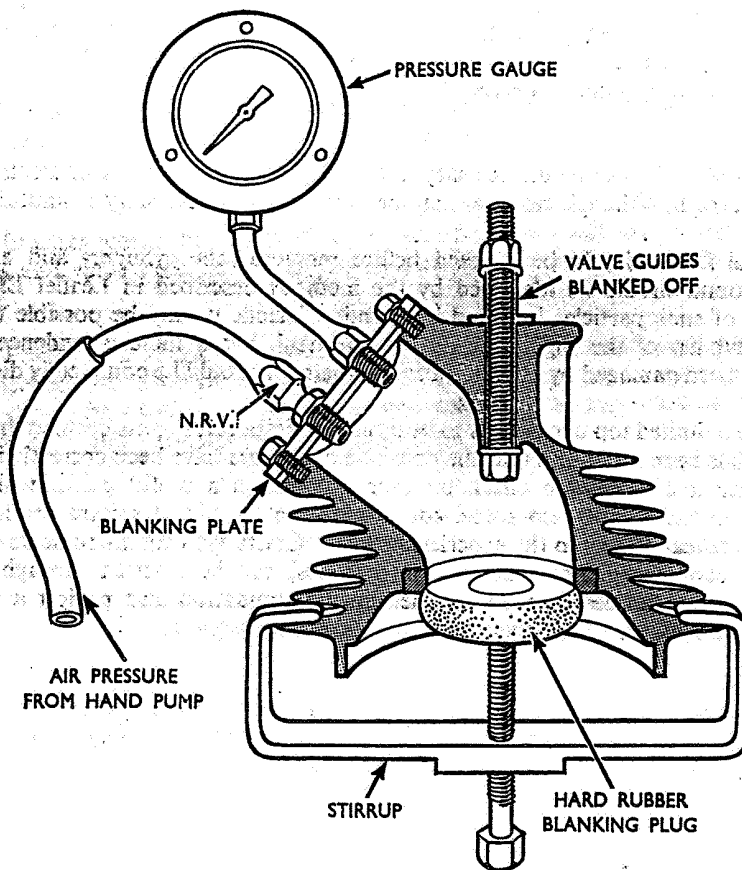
PRESSURE TESTING VALVE SEAT INSERTS
